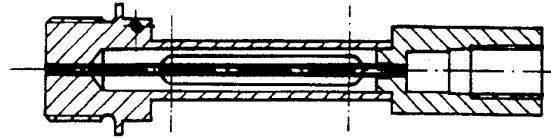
Cooling Adapter for Pressure Measurement at the Compressor Casing
